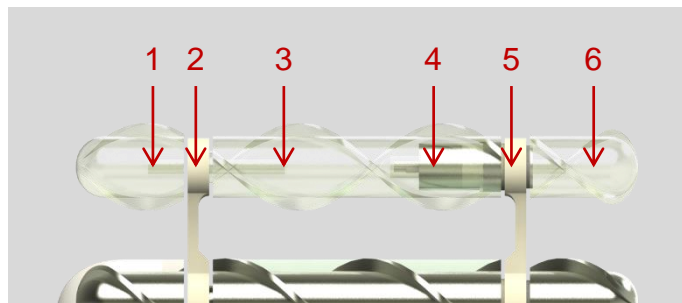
Motor arrangement for the screw actuation motor in Quad Screw Device Version 2. Annotations show: 1) Front-section screw; 2) Front controllable arm section; 3) Mid-section screw; 4) Screw motor; 5) Rear controllable arm section; 6) Rear-section screw.
